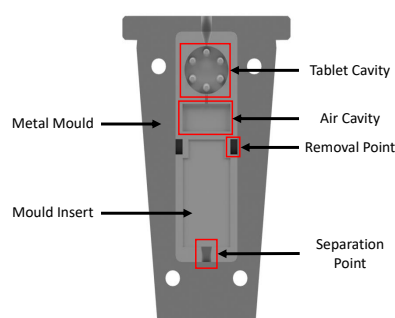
The mould insert for the 6 Pin Design inserted into the metal mould. This depiction represents one half of the full mould.
